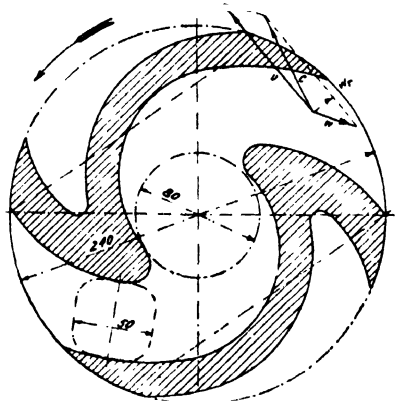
Impeller of Unchokeable Centrifugal Pump.
